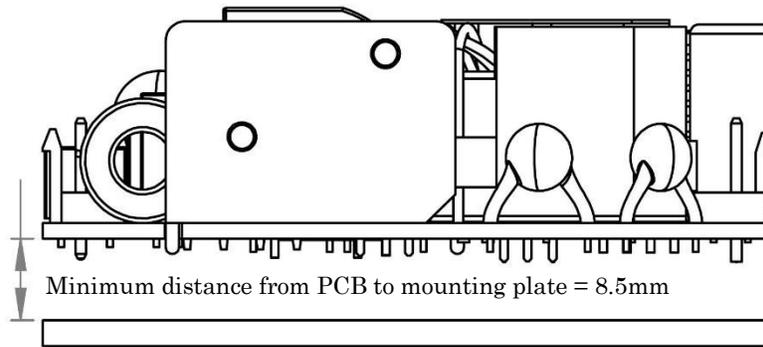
MLD40 models: Mounting Hole Locations and Dimensions
